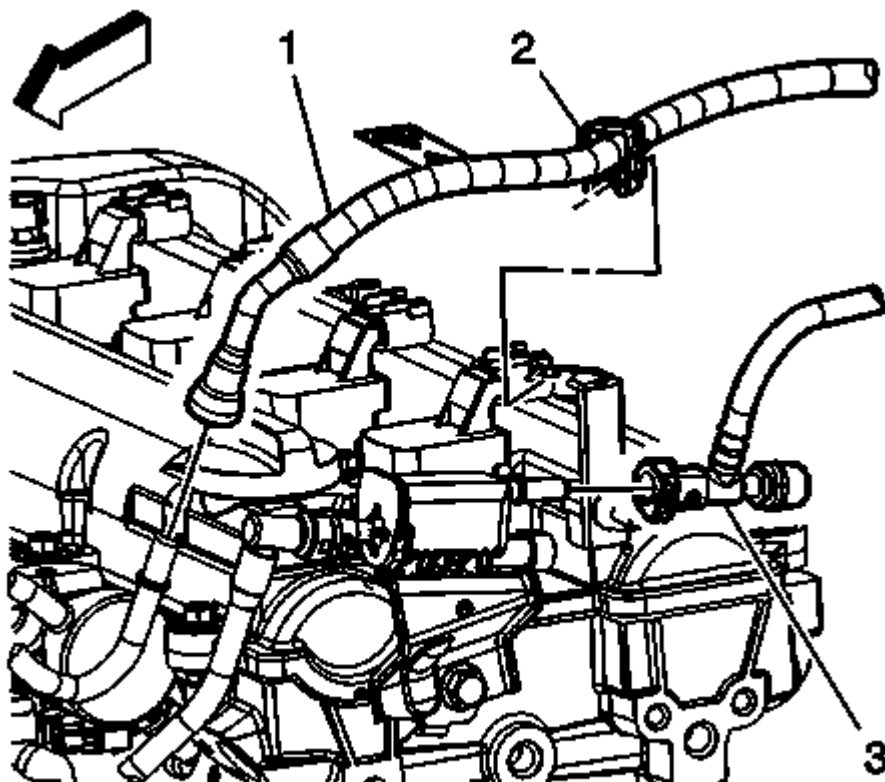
View Of Fuel Feed Pipe Retainer & Fuel Pipe Bracket
